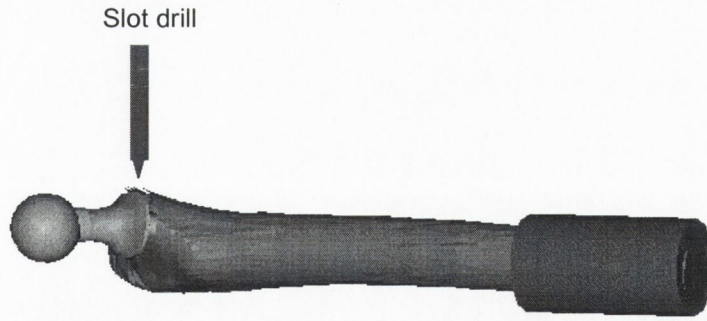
The implanted composite femur is mounted on a milling machine, and using a long series solid carbide drill, 3mm is machined from the bone underneath the collar.
